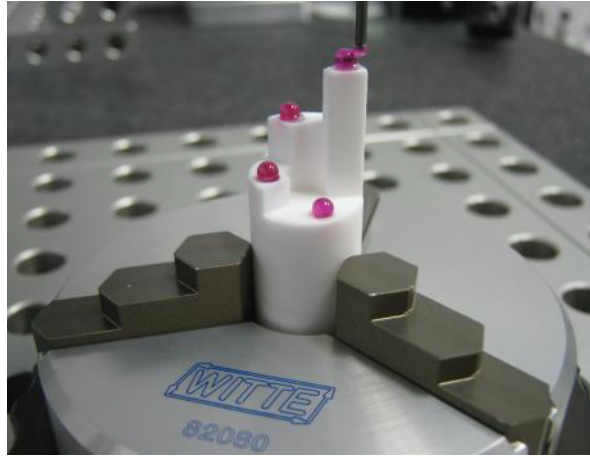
The ruby sphere workpiece being measured with a CMM.
